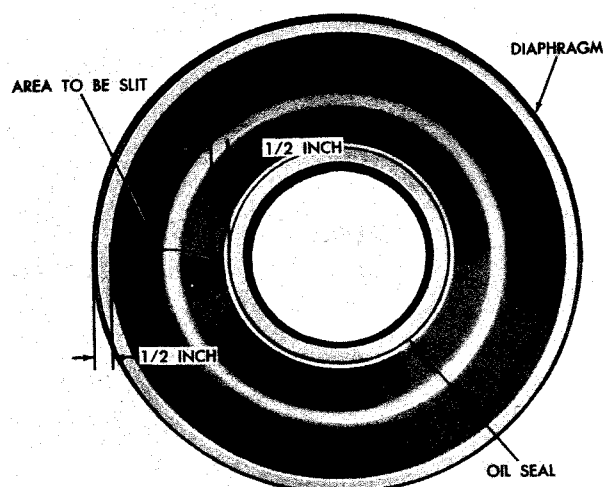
Diaphragm slit for removal from "dry" converter housing
